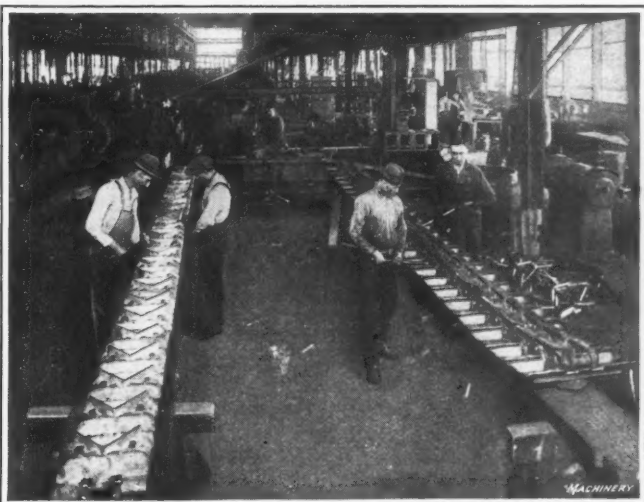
Assembling Tracks for 75-horsepower Tractors
